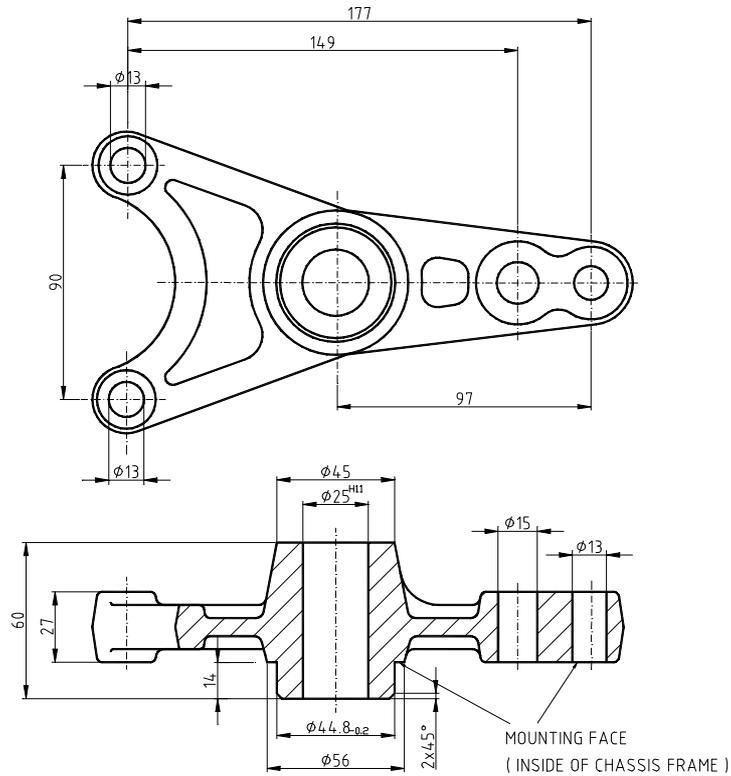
Center mounting support parts number: A 427 551 03 21
